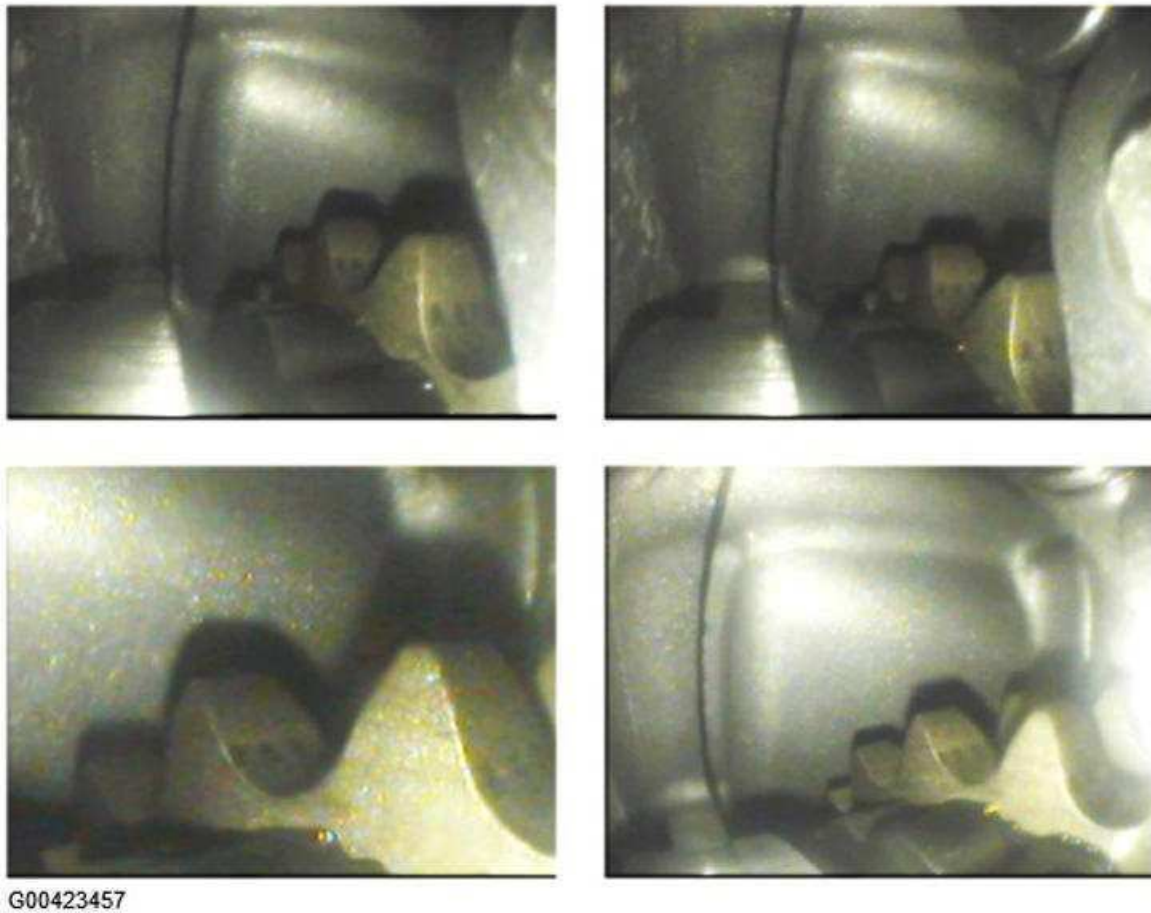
Example Images Of Balance Shaft Sprocket (Sprocket OK)
